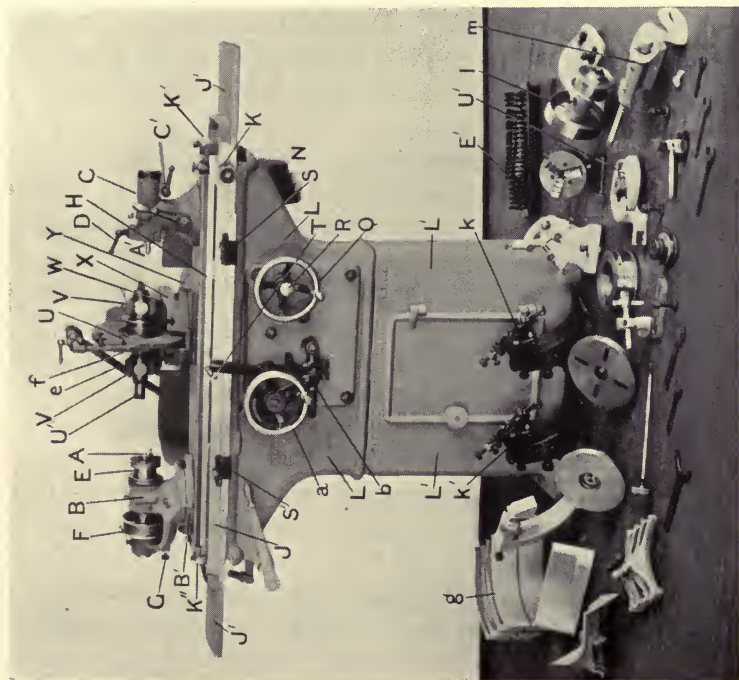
BROWN & SHARPE No. 1 UNIVERSAL GRINDER
